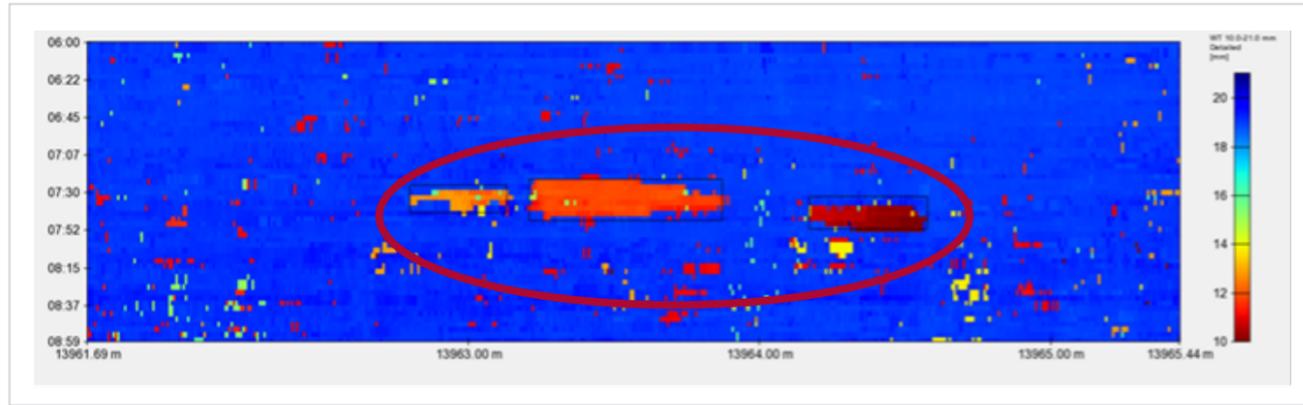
C-scan showing example A of Mid-Wall Lamination
